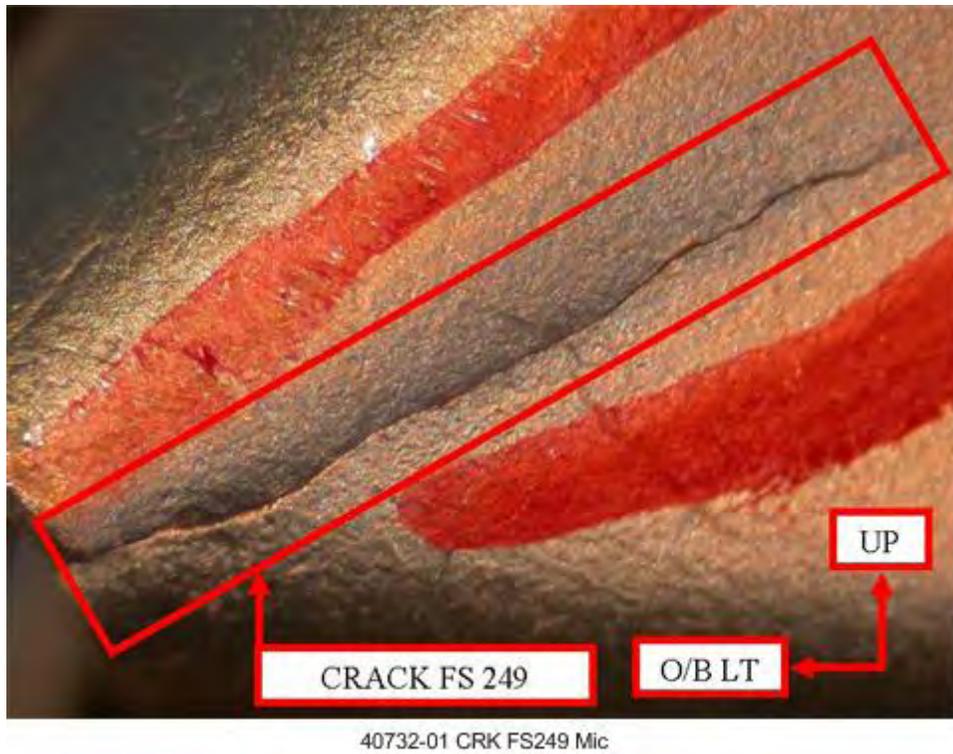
Microscopic View of Crack on the Bulkhead Right Aft Fuselage FS 249
